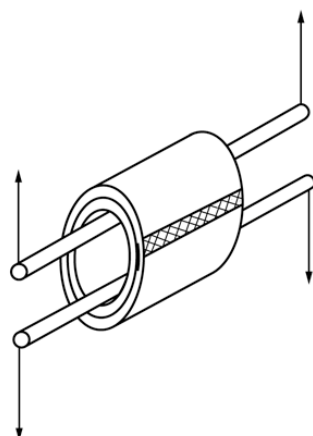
Schematic Presentation of the Pipe Ring Test Showing the Aluminum Weld at 90° to the Tensile Axis
